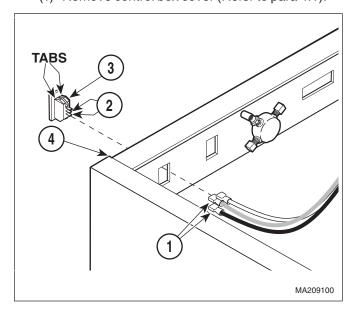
VACUUM ON / OFF Switch Removal / Installation
